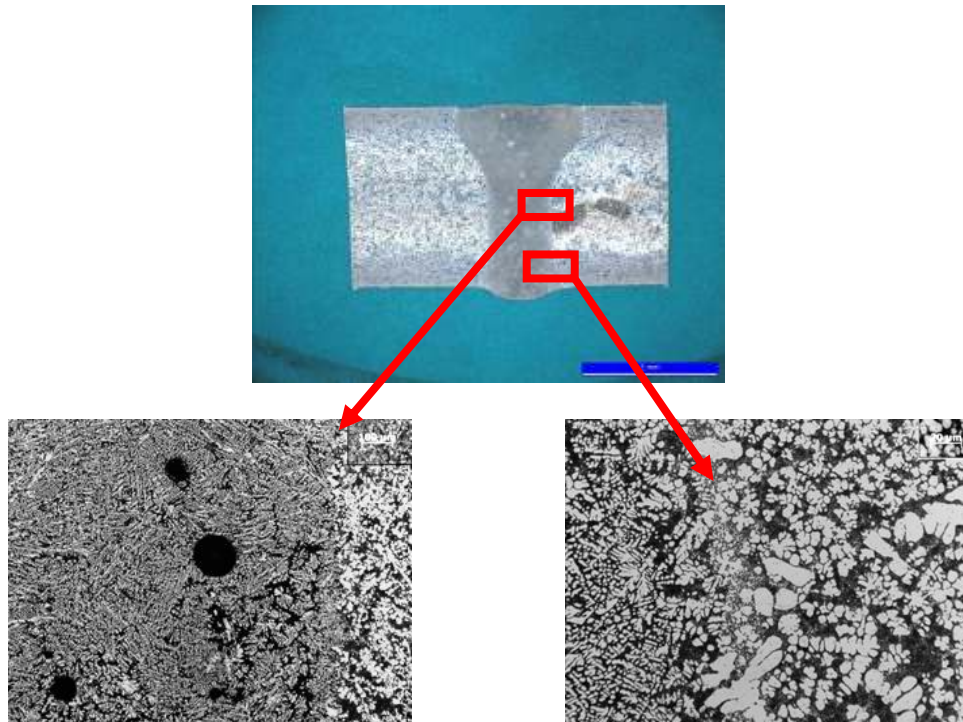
EBW welding seam on a 4 mm wall-thick plate in Silafont[®]-36.
